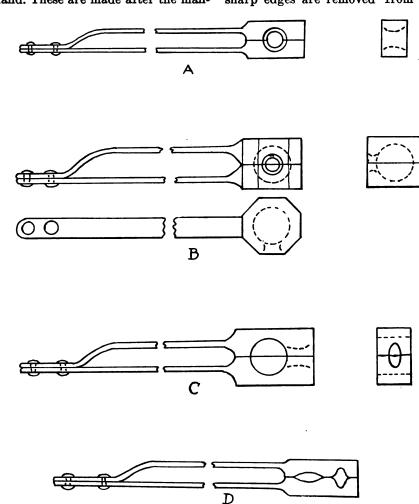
THE TOOLS USED FOR FORGING OPEN END WRENCHES UNDER THE STEAM HAMMER
